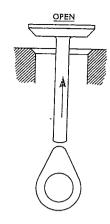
As the high part of the lobe comit pushes the valve open.
